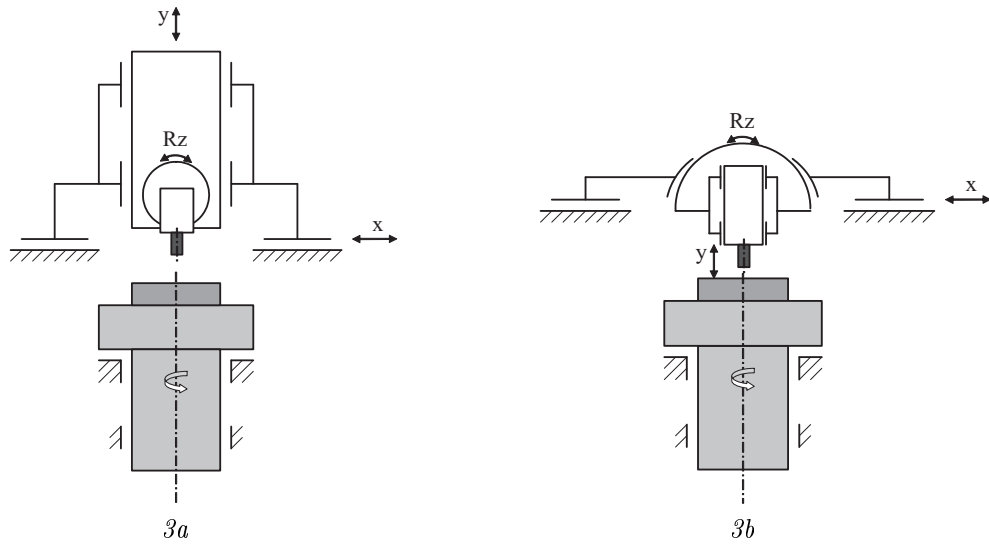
Layout 3, fixed workpiece spindle and small y-slide
